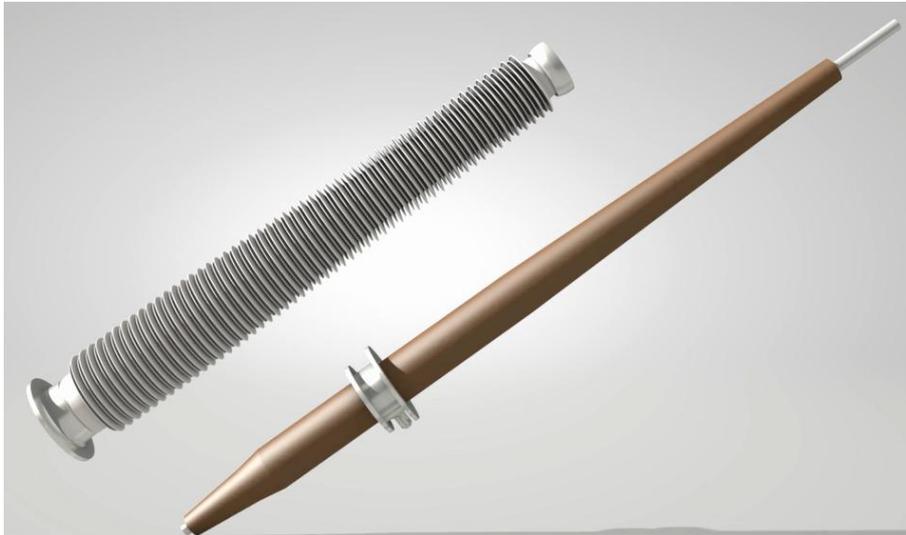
Primary bushing components: The outer insulation at the left and the inner insulation with the mounting flange and the conductor tube in the center.
